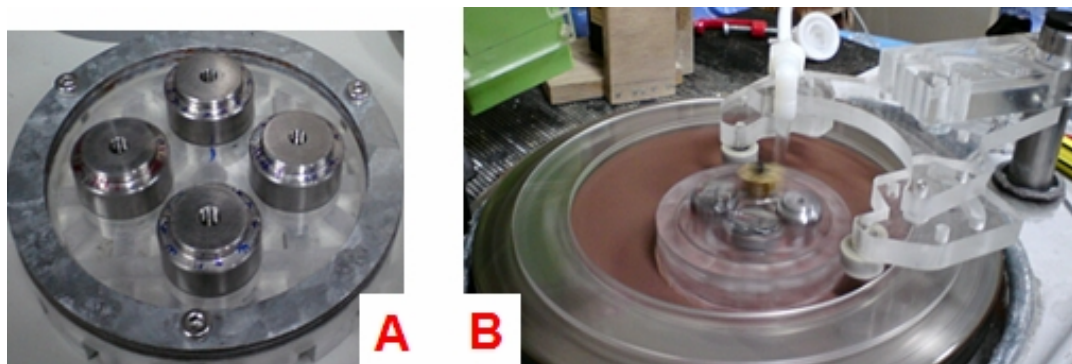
(A) small workpiece fixture (B) small workpiece fixture is operation.
